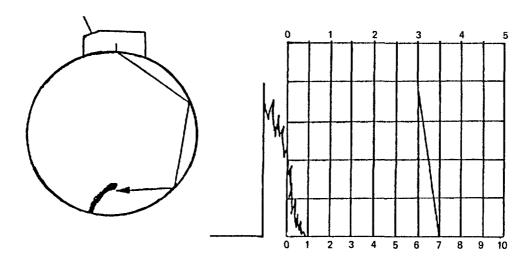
Detection of longitudinal surface flaws in round billets using angle probes.
